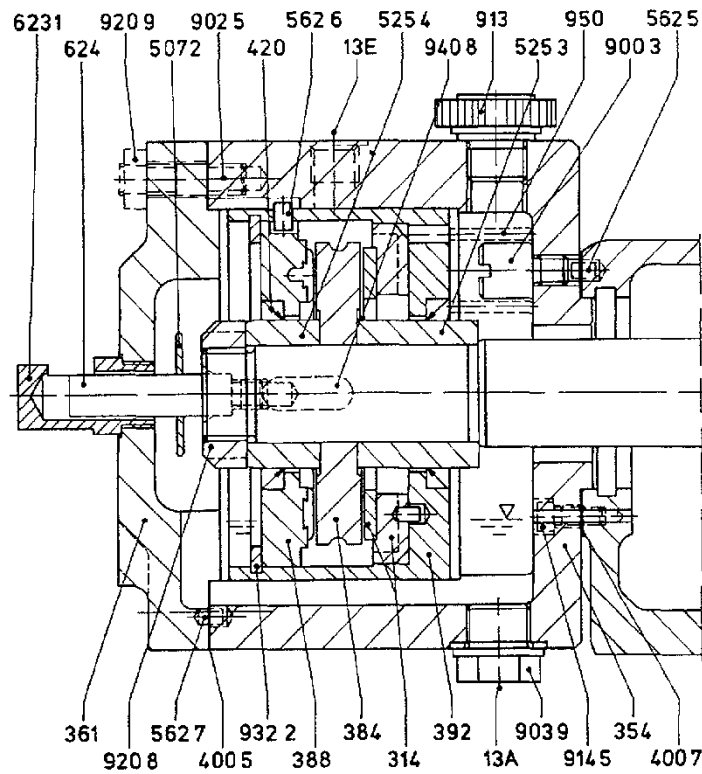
Lift-off device with forced feed lubrication for pumps with plain bearings
